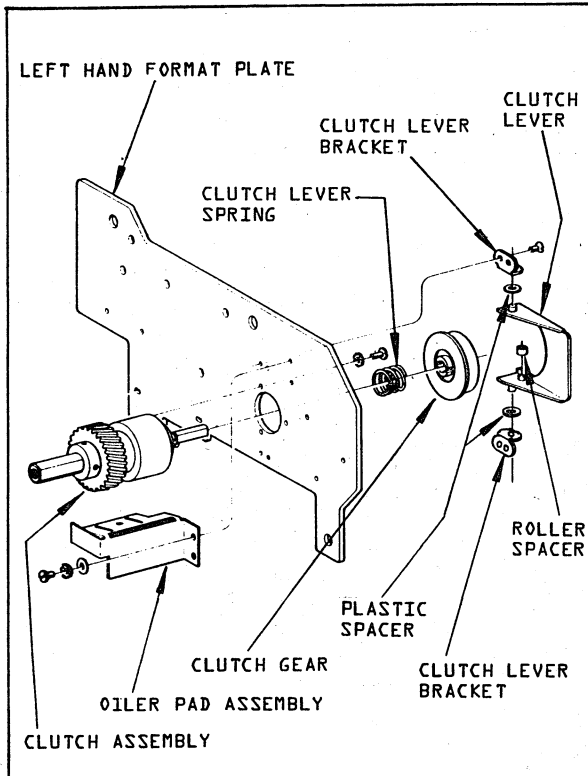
CLUTCH ASSEMBLY REPLACEMENT
